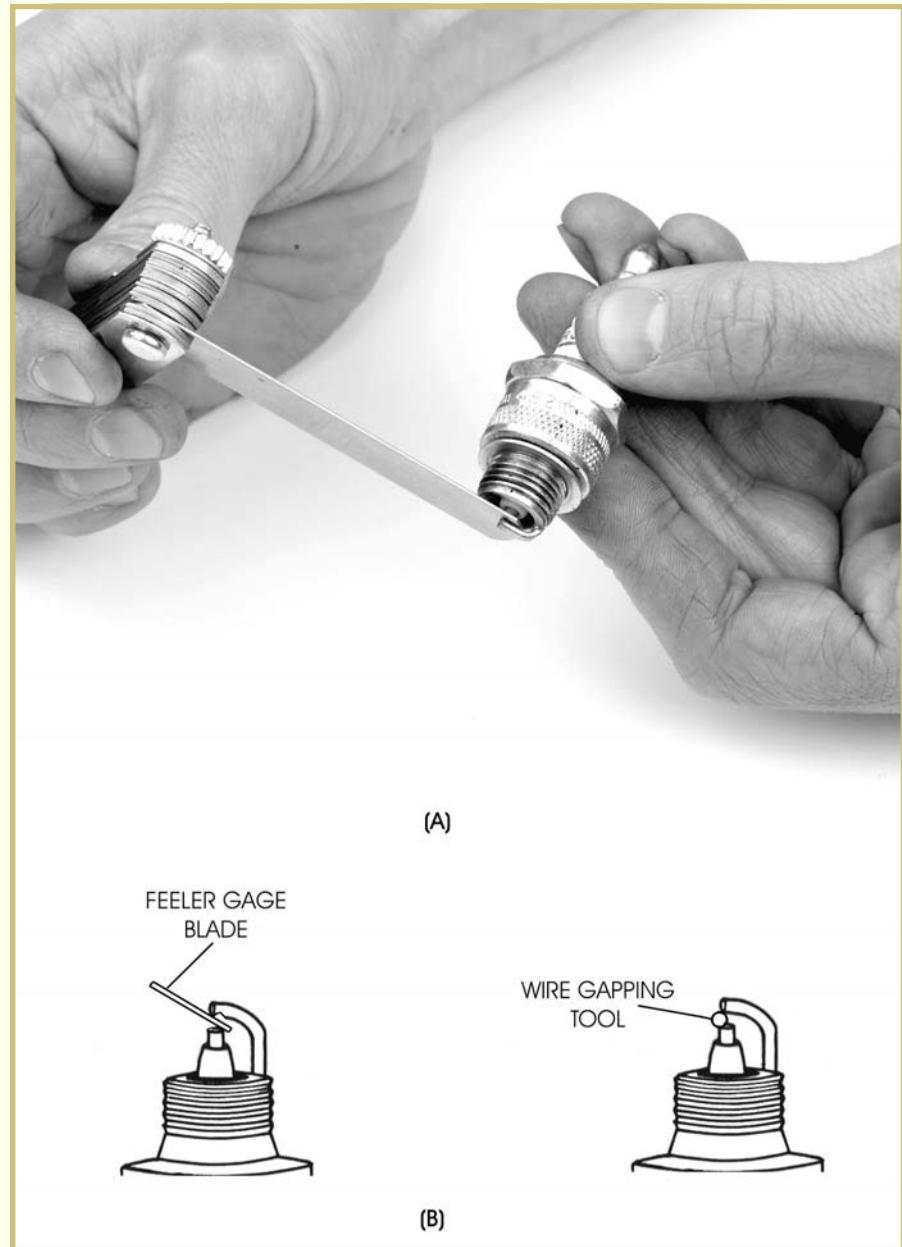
A feeler gage can also be used to measure a plug's gap. However, the wire gapping tool provides a more accurate measurement of the gap.
